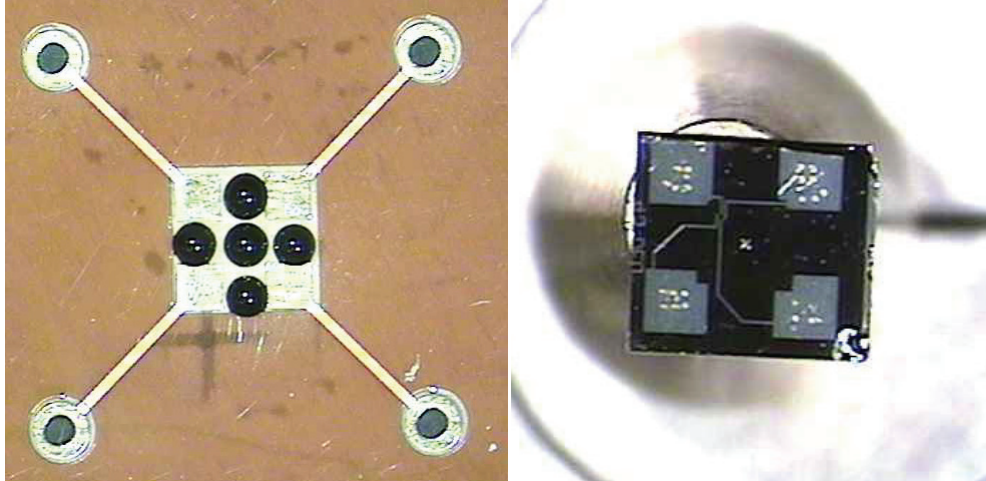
Microphotographs of the FPCB and sensor pad chip being flip-chip bonded using coined stud bumps and underfill adhesive. Left: FPCB with non-conductive adhesive between the contact pads. Right: sensor pad chip with several gold coined stud bumps affixed to each pad using the wire bonder.
